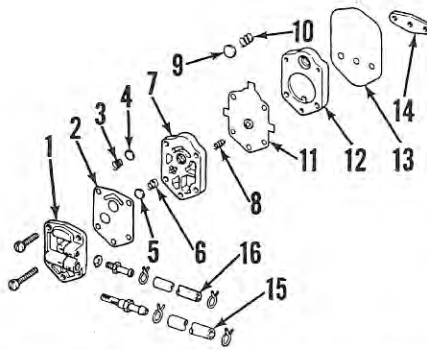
Exploded view of diaphragm type fuel pump used on early models.
